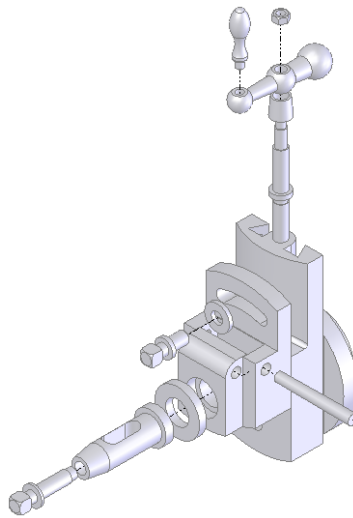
Exploded view of the Shaper tool holder assembly with explode lines
